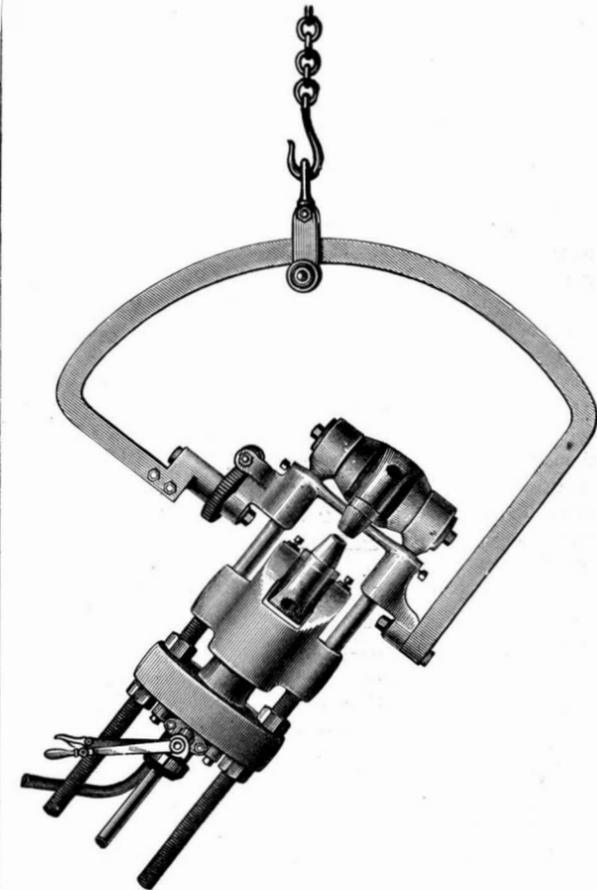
SUSPENDED RIVETING MACHINE—BOTTOM VIEW.
